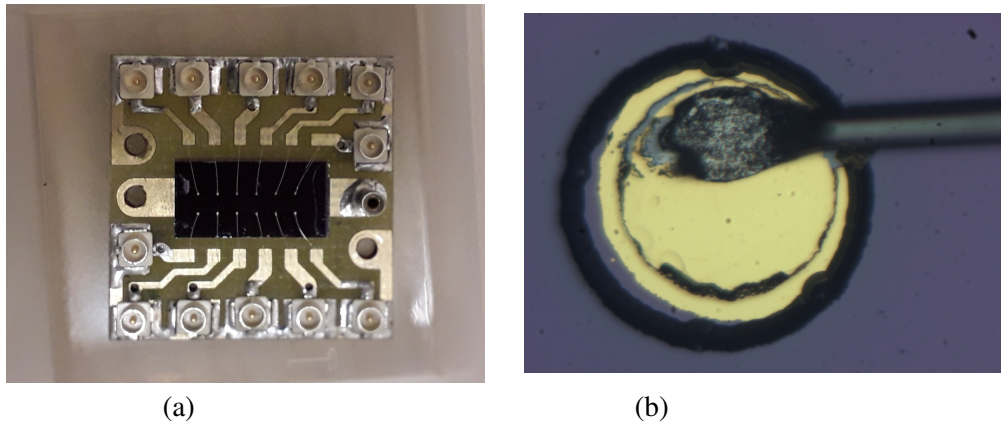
Set of 12 devices bonded on the PCB (a) detail of single device (b).
